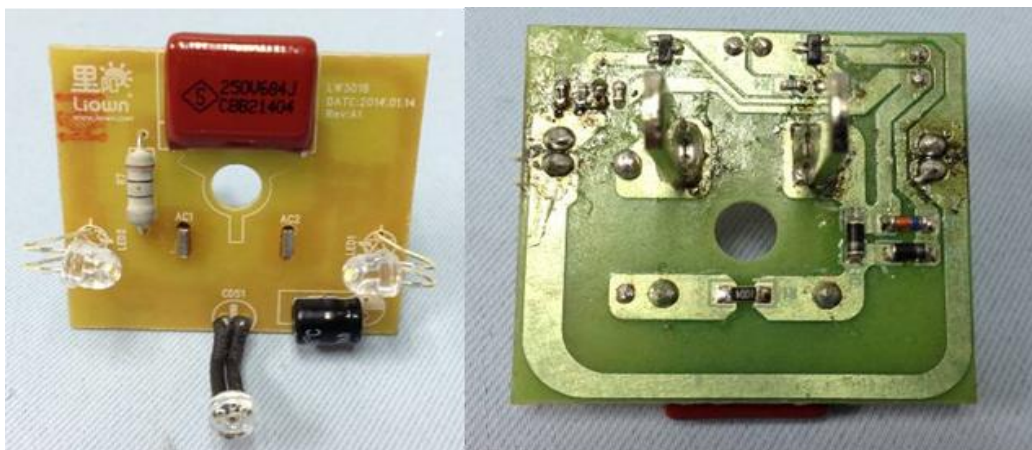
PCB view of model LW3018,092-08-0225, E1143201, ENLPLVCW##.
